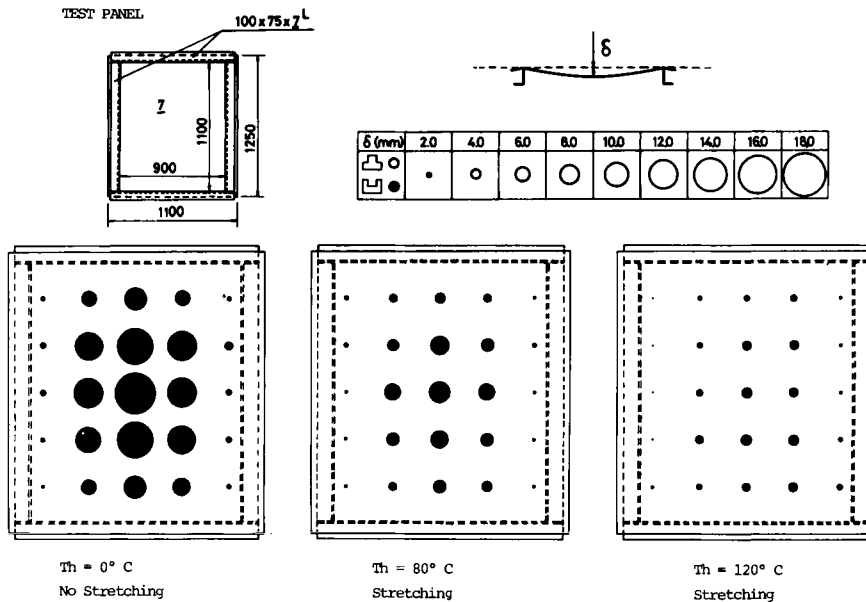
How the SSH method reduces distortion in welded low-carbon steel plate panel structures 7 mm ($\frac{1}{4}$ in.) thick (Terai *et al.*)⁽⁷⁴³⁾
